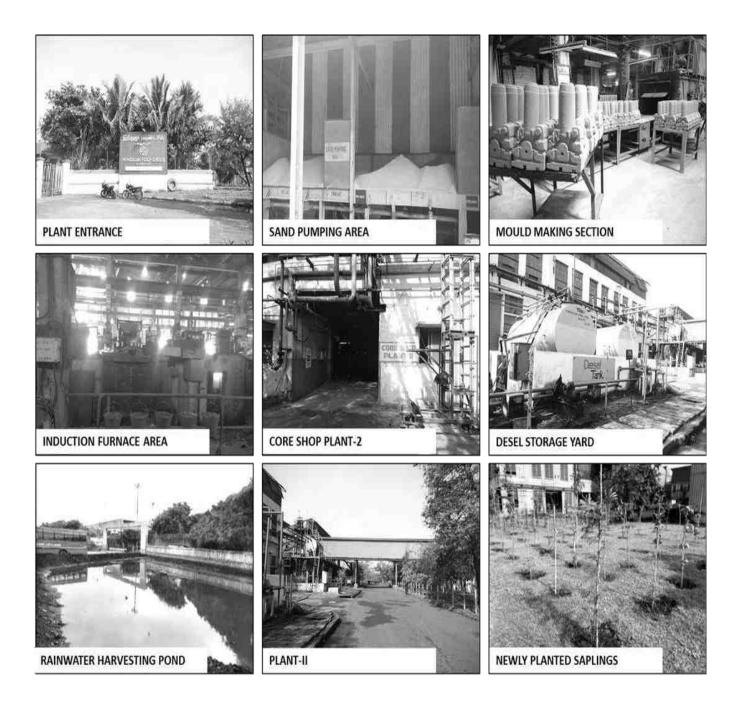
PHOTOGRAPHS OF EXISTING PLANT SITE
